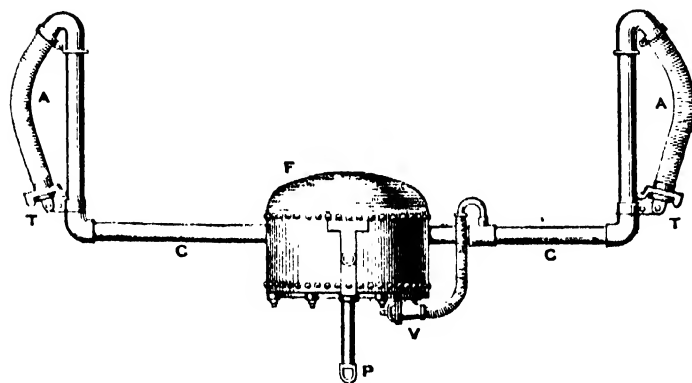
Vacuum Brake Cylinder and Train Pipe
